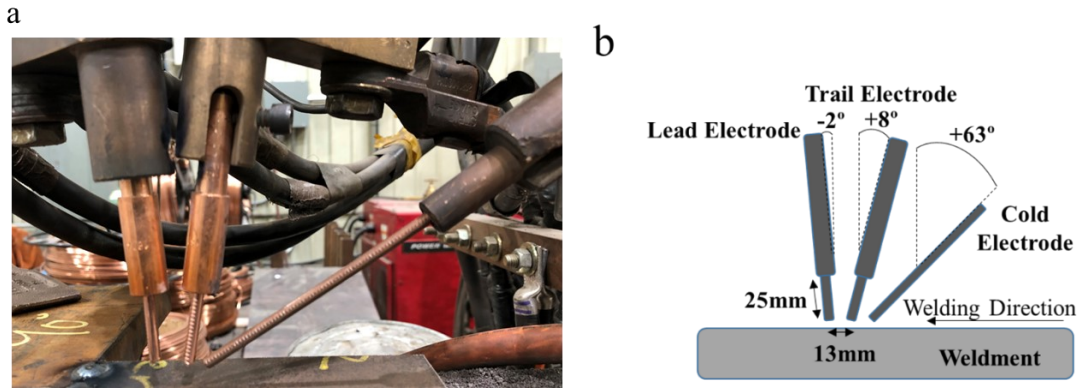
Setup for CWTSAW process: a) Actual welding set up and b) schematic view of fixed welding variables.
